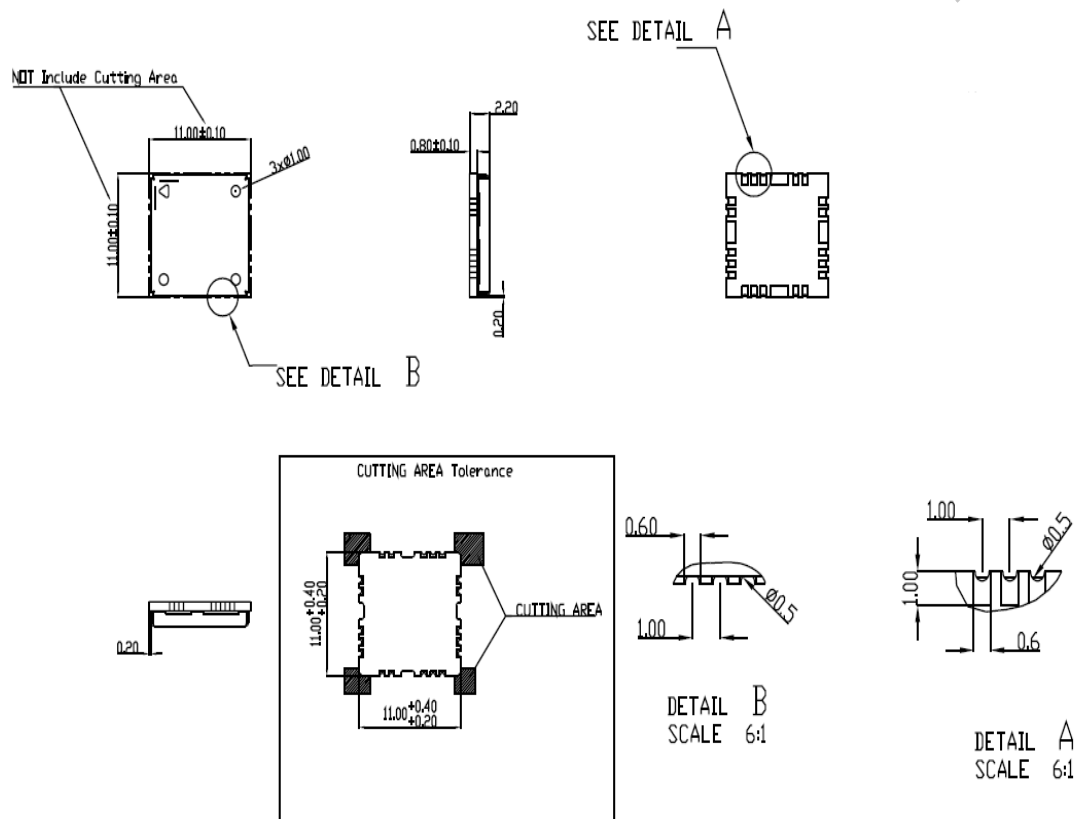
SIM18 mechanical dimensions (Unit: mm)
